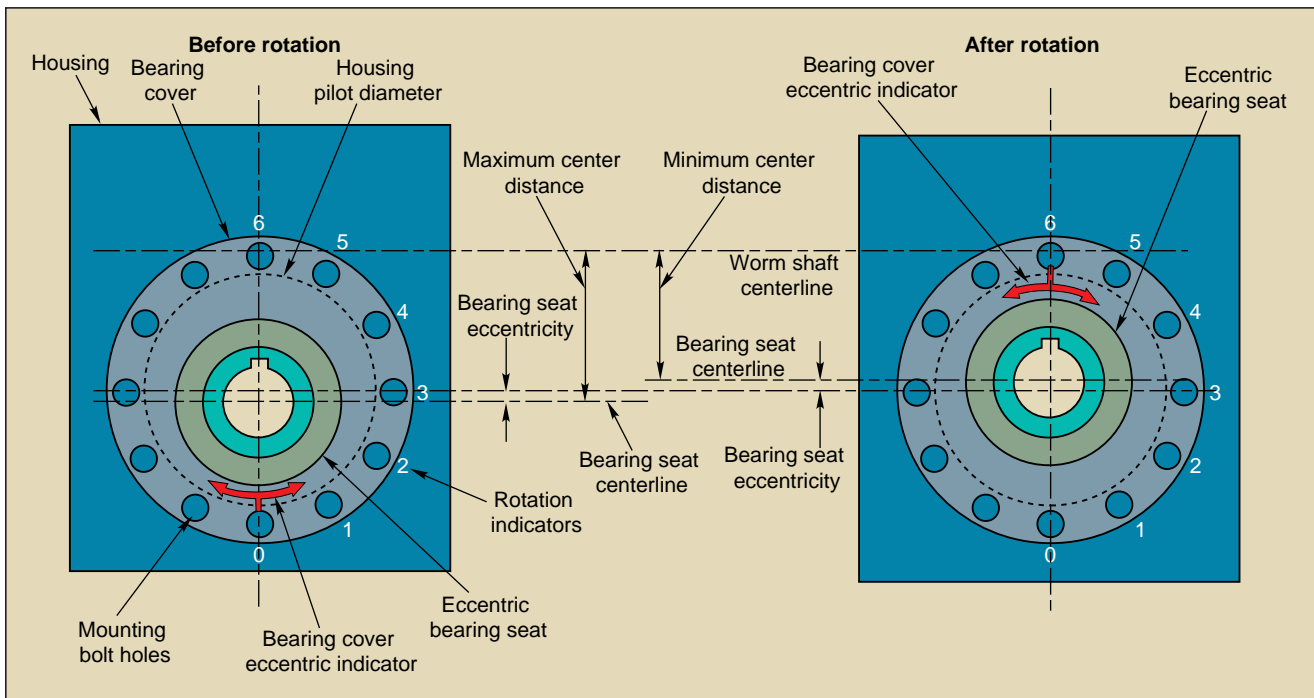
Bearing covers move the worm gear shaft up to reduce backlash. For lower backlash, rotate each cover so its indicator moves from its original position to the next higher position on the housing. This moves the worm gear up into a tighter mesh with the worm, thus minimizing backlash between them.
